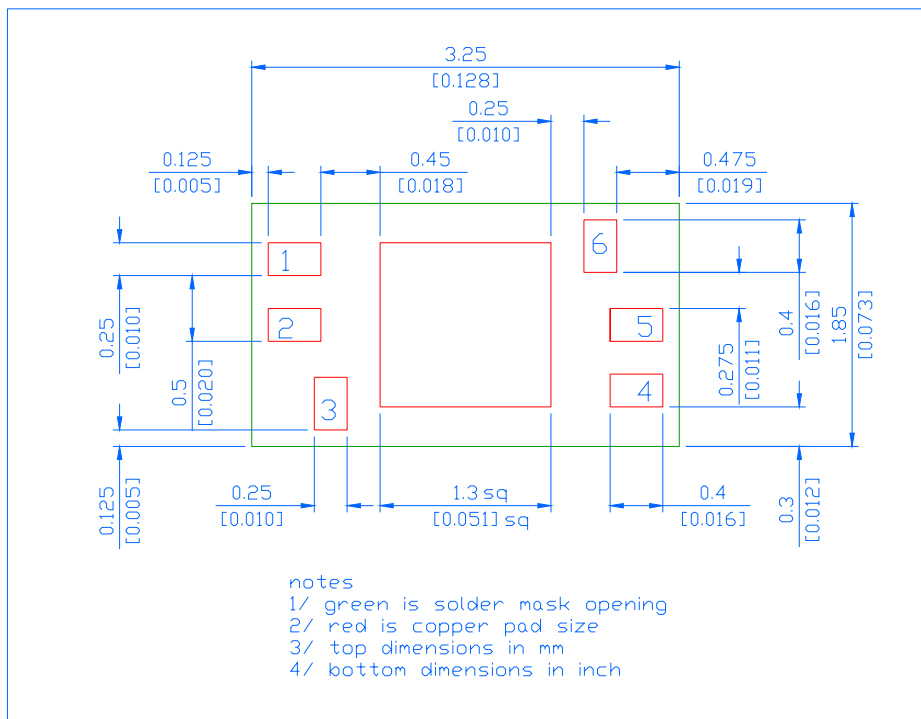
6-Pin LPCC Printed Circuit Board Footprint
